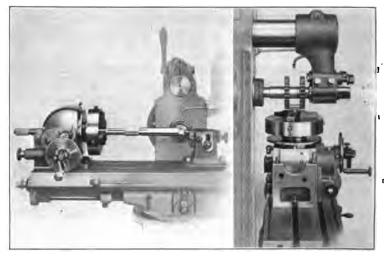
Milling square on a long reamer. Fig. 220.—Straddle milling.
